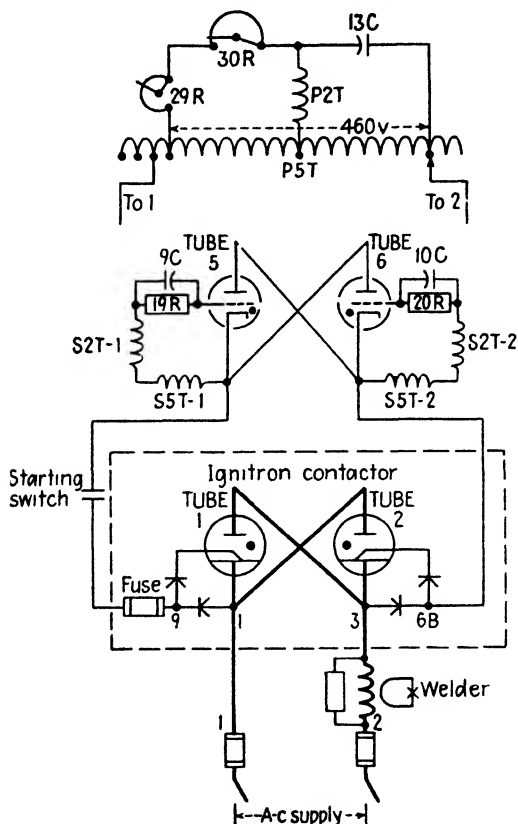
J.—Welder heat control added to an ignitron contactor.
